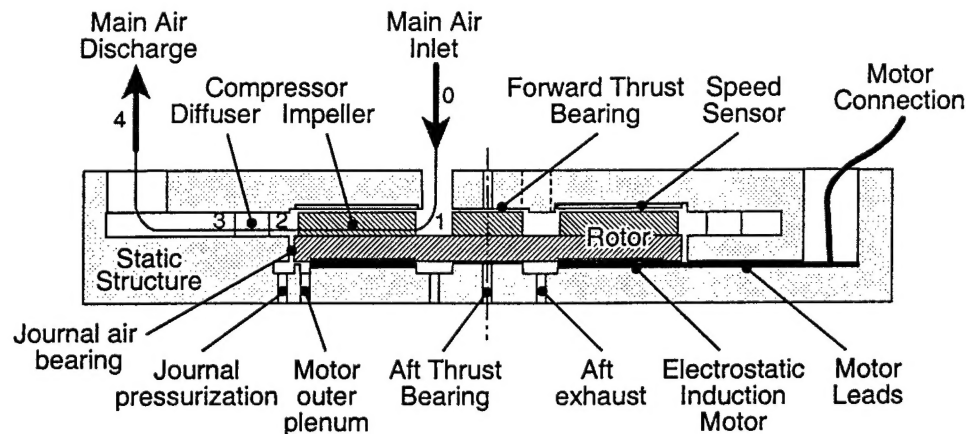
Schematic of motor-compressor cross-section illustrating the main system components.
